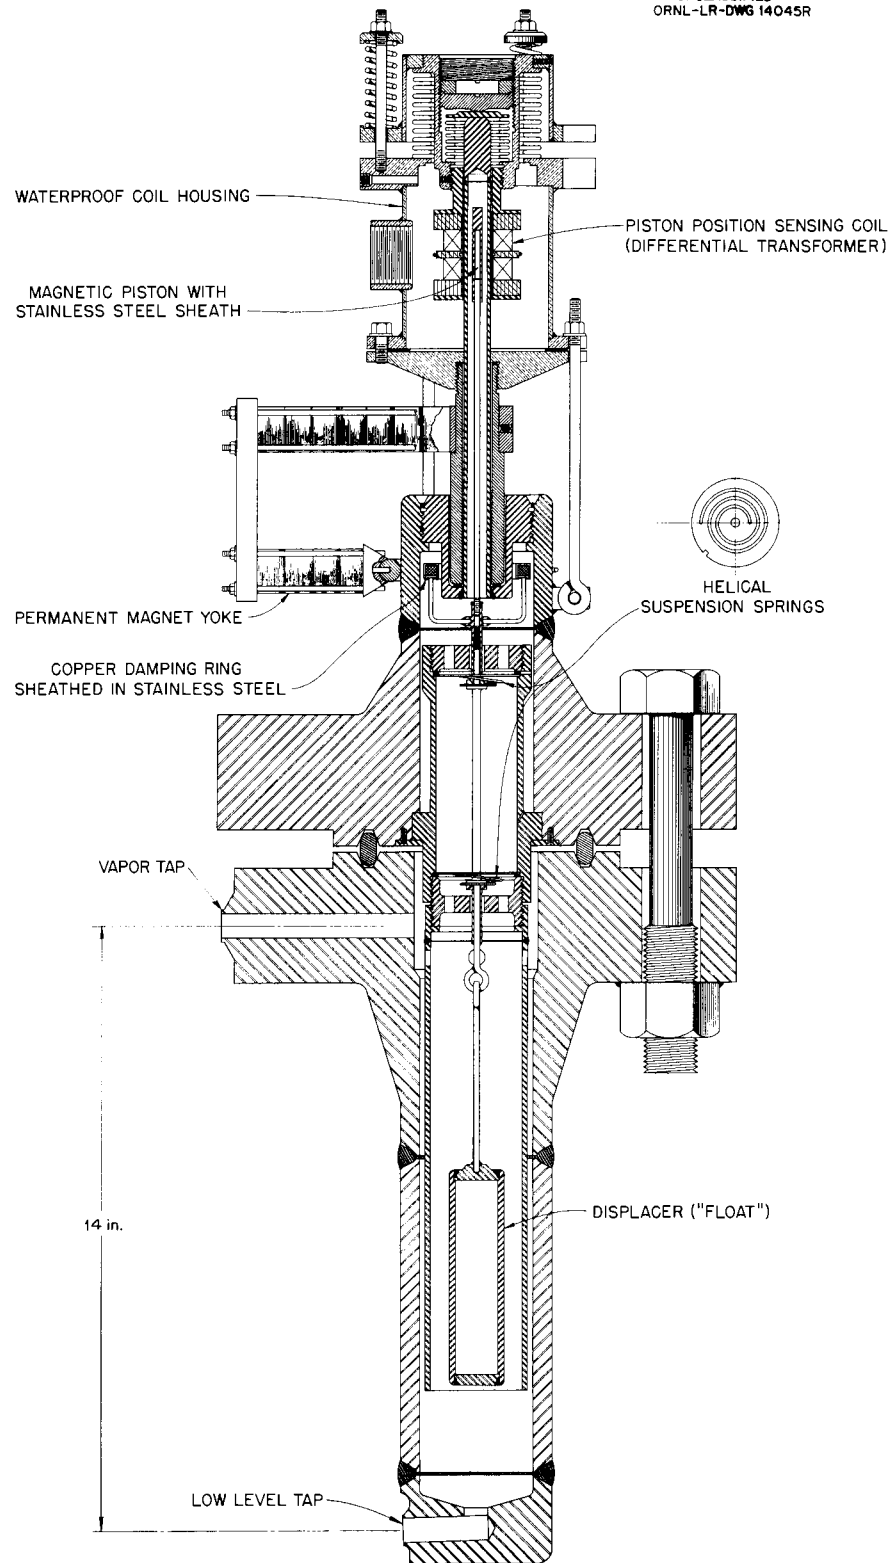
HRT Pressurizer Liquid-Level Transmitter Assembly.
